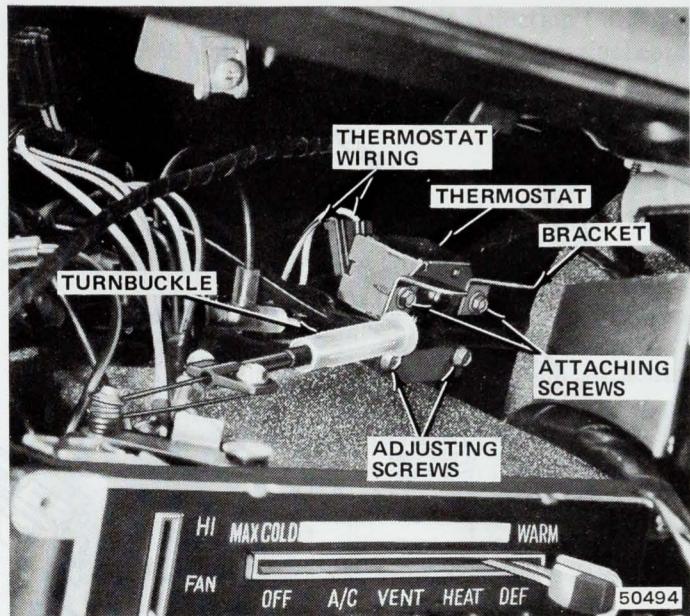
E-27 Temperature Control Thermostat and Blend-Air Door Cable Turnbuckle
